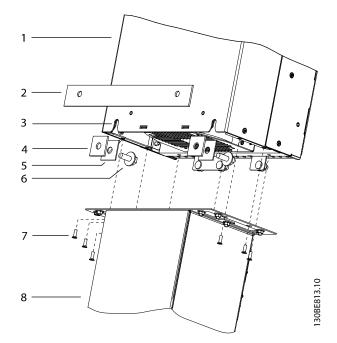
Installing the Drive Modules onto the Mounting Backplate
